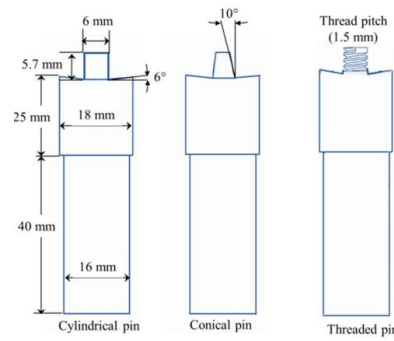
Tools used to weld 6 mm thick PLA in butt joint configuration by FSW [75].
